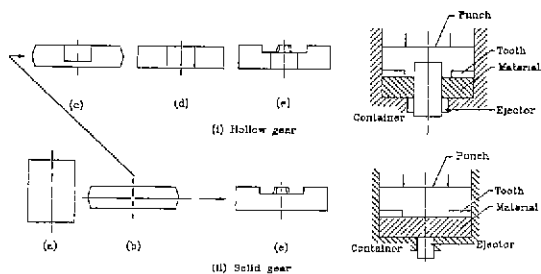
Near-net shape forging processes of a crown gear form, (a) initial billet, (b) upsetting, (c) extrusion, (d) piercing, and (e) closed-die forging
